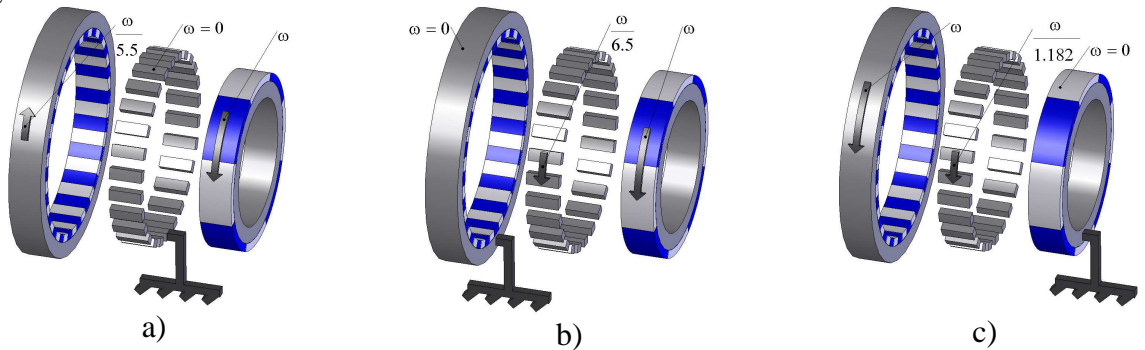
Exploded view of the magnetic planetary gear in 3 different configurations: a) Iron segmented rotor fixed. b) Outer rotor fixed. c) Inner rotor fixed.
